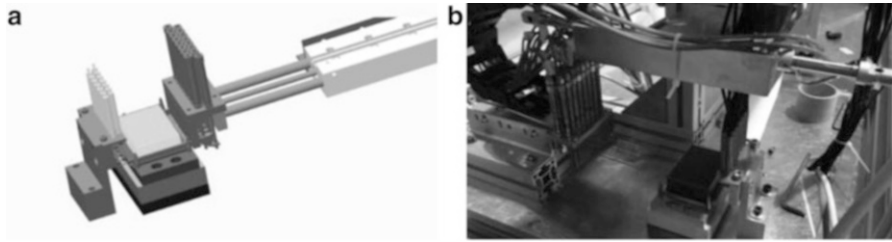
The mechanism of folding model (a) real mechanism (b)
